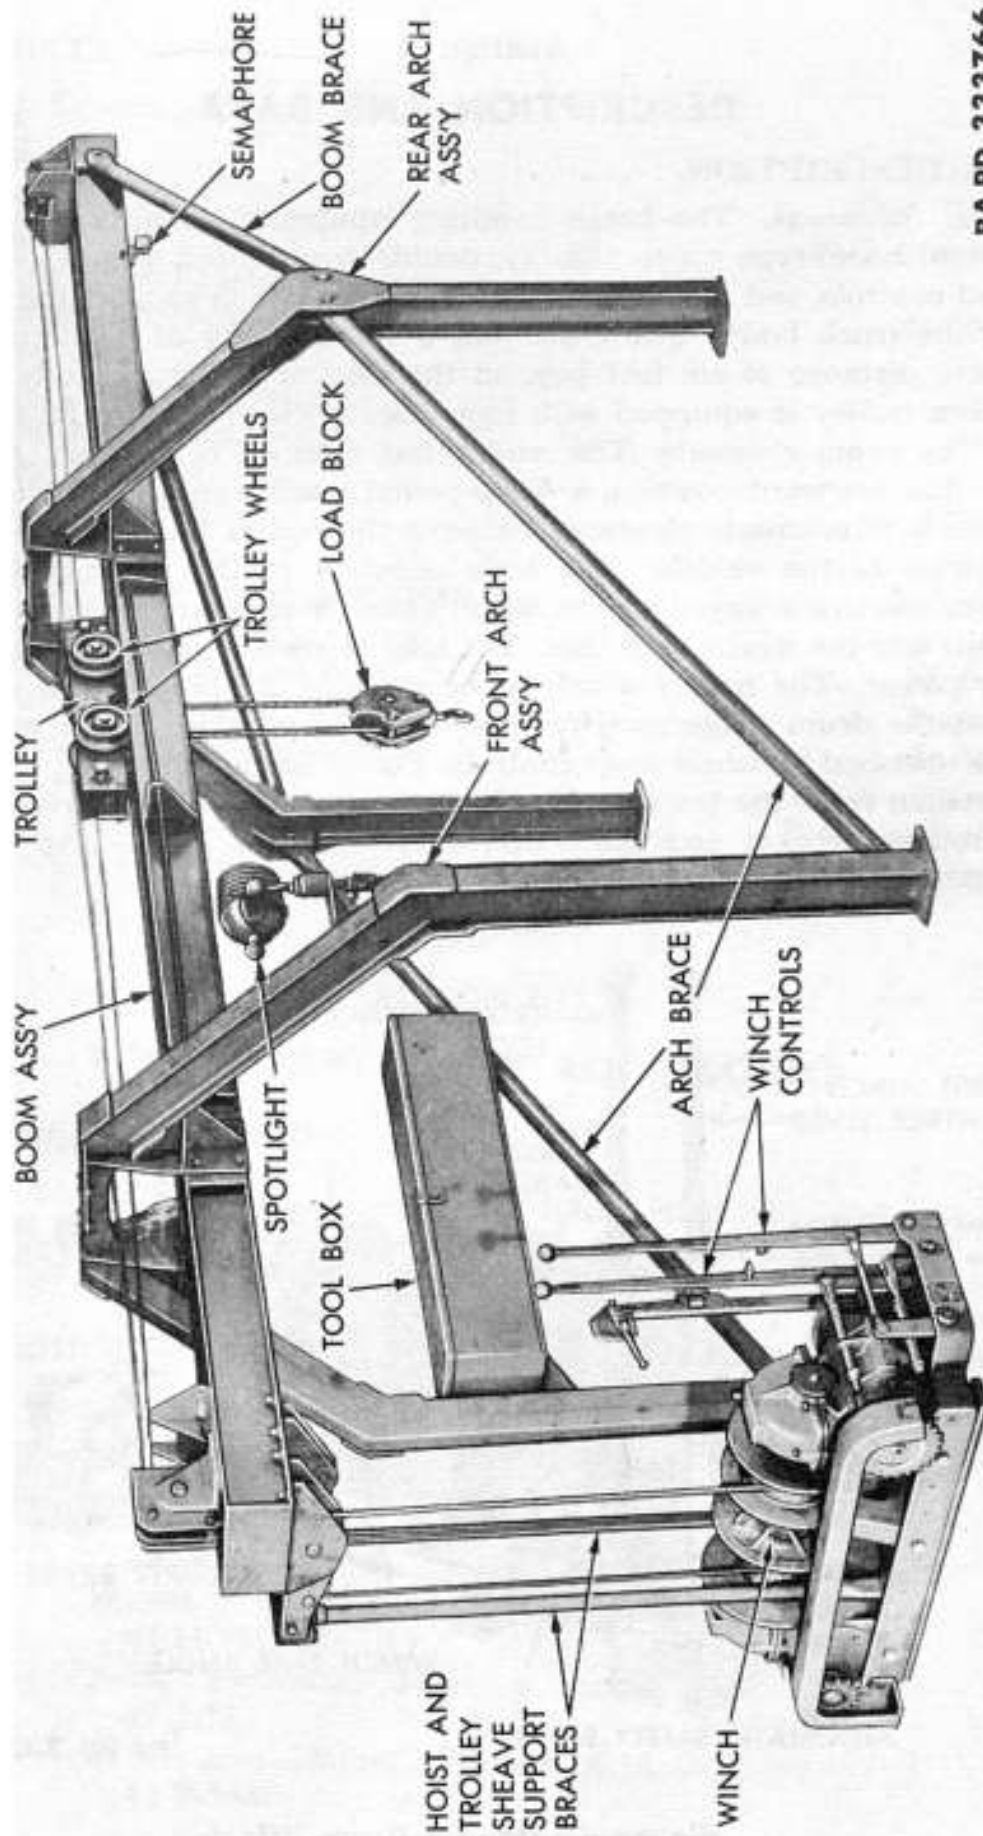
Bomb Service Equipment (Less Auxiliary Drive)
